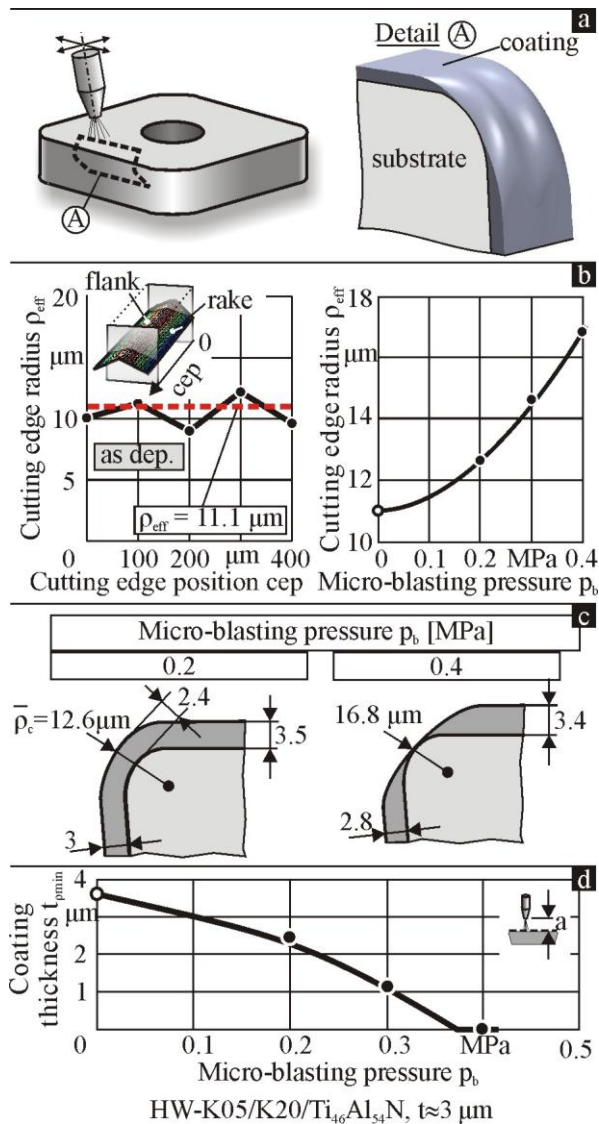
(a) Micro-blasting effects on cutting edge geometry, (b) Cutting edge radius ρ_{eff} , (c) cutting edge geometries, (d) minimum coating thickness t_{pmin} of wet micro-blasted coated inserts at various conditions
